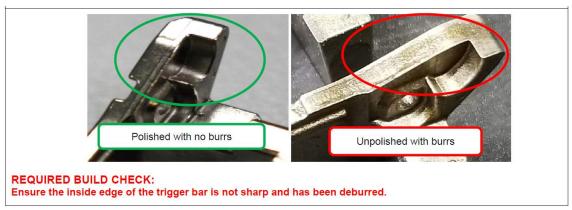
Image from Sig Sauer P320 Assembly and Quality Inspection Master
